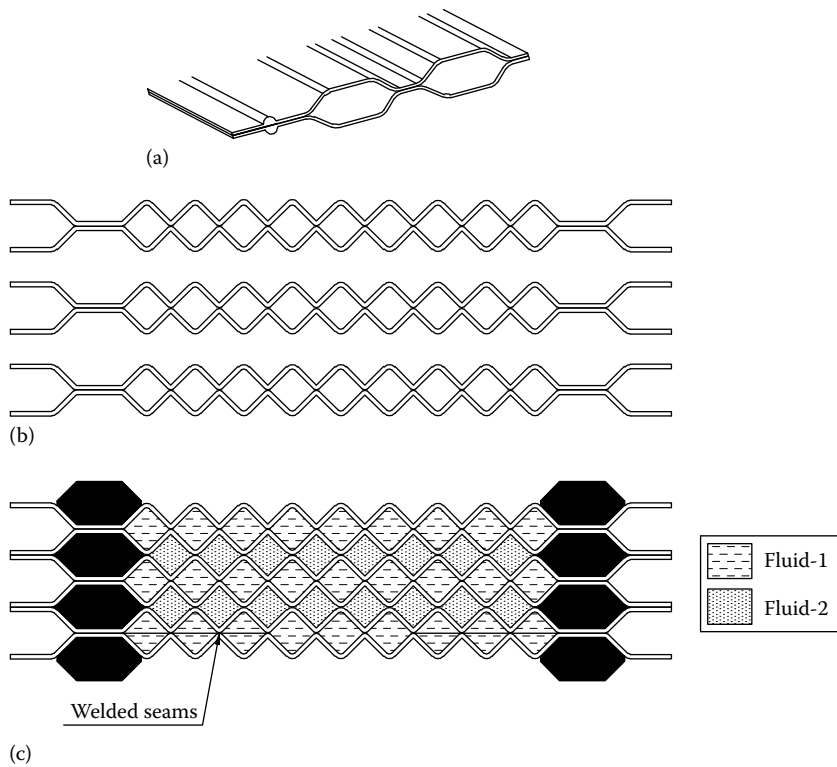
Semiwelded plateflow design: (a) and (b) concept and (c) assembly.
